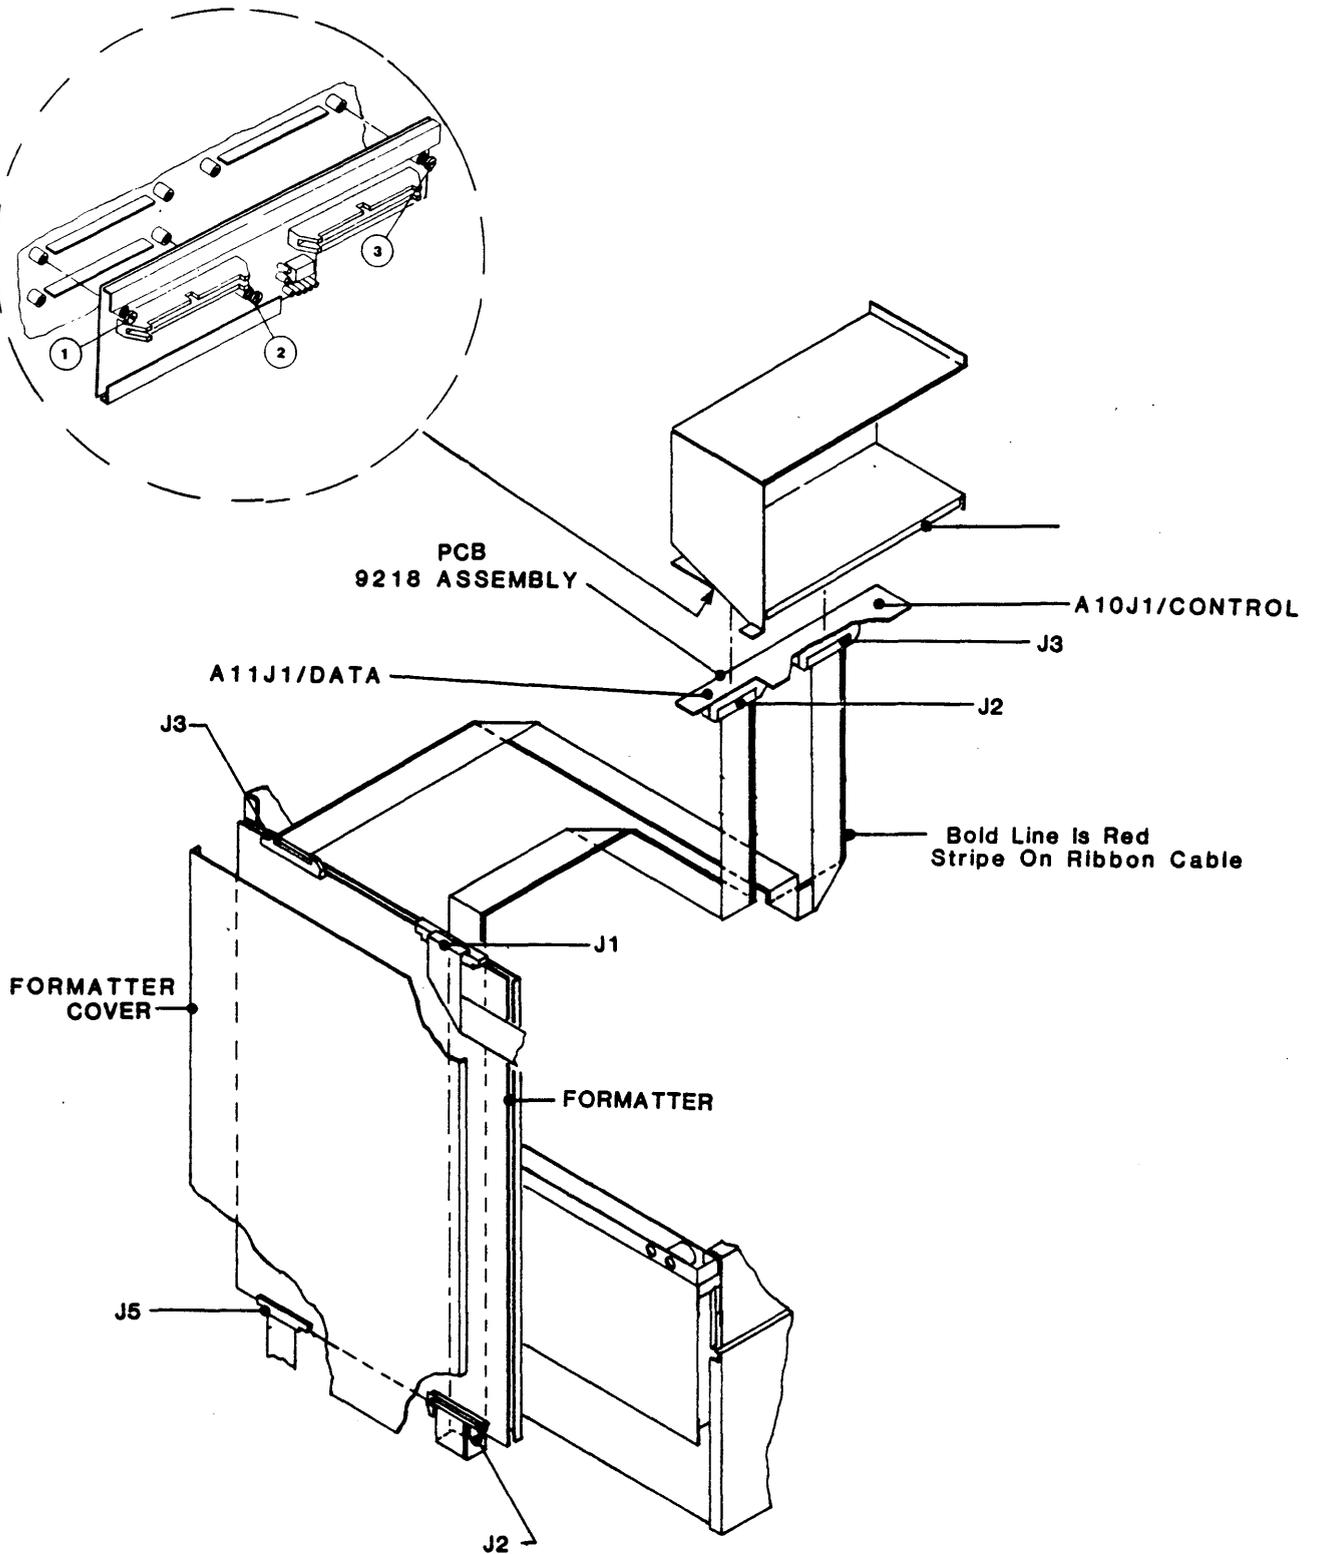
Model 9100 Drive to Formatter Interface (Rear View)
